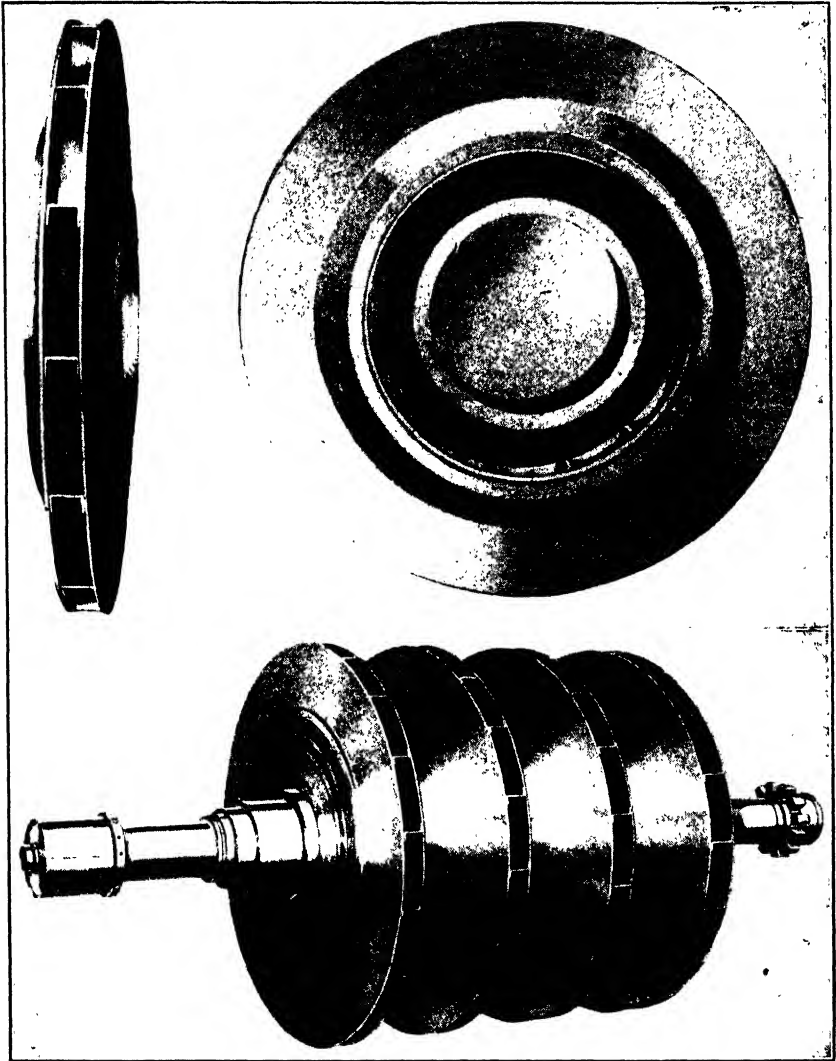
Steps in manufacture and assembly of thick impeller vanes.
